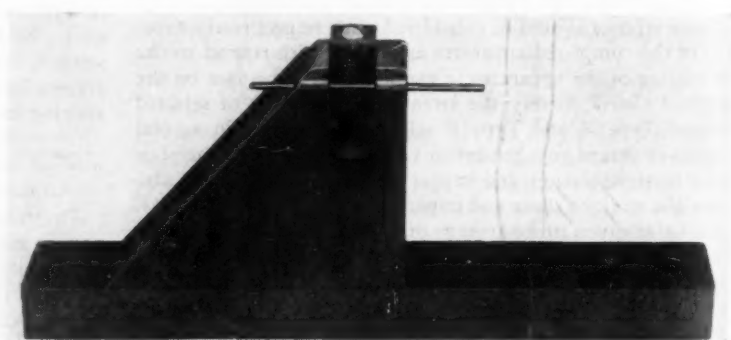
IMPACT-SHEAR-TEST FIXTURE
